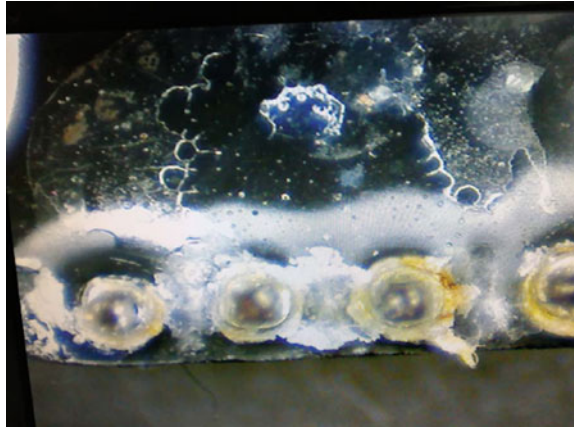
The corrosive appearance of the connecting line of C-version PCB
